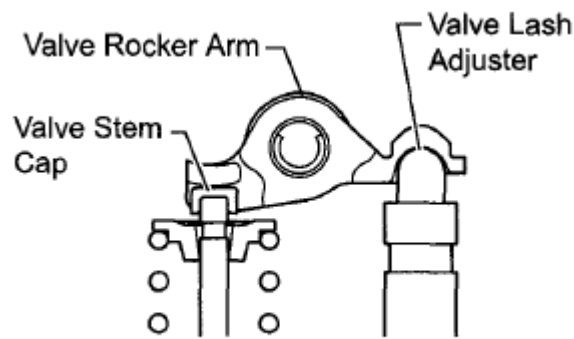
Identifying Valve Lash Adjuster, Valve Stem Cap And Valve Rocker Arm
